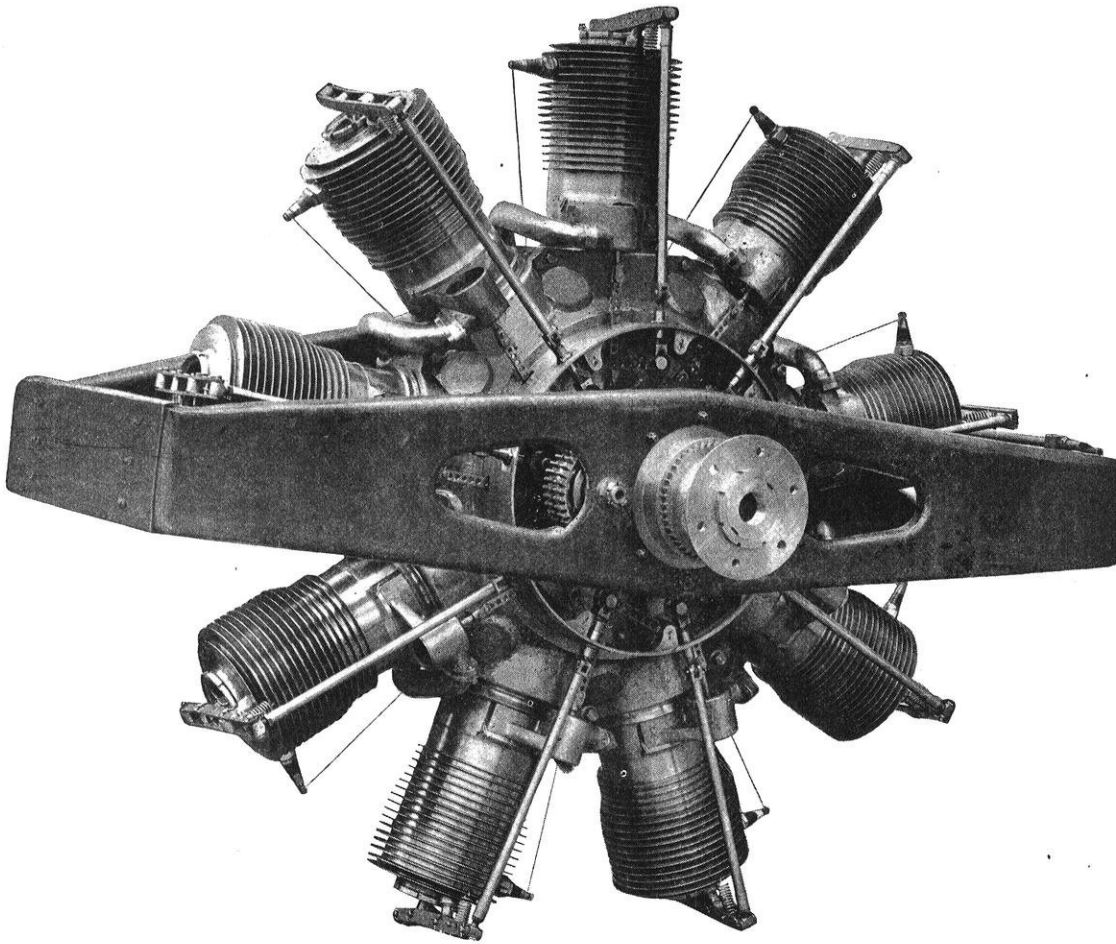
Front View, 9-cylinder Cyro Rotary Engine in Cradle.
